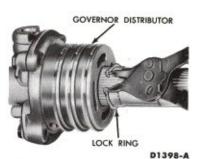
Governor Distributor Lock Ring Removal or Installation
